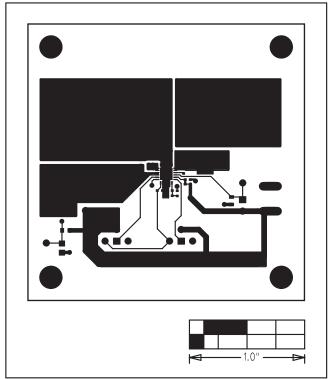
MAX17083 EV Kit PCB Layout—Component Side
